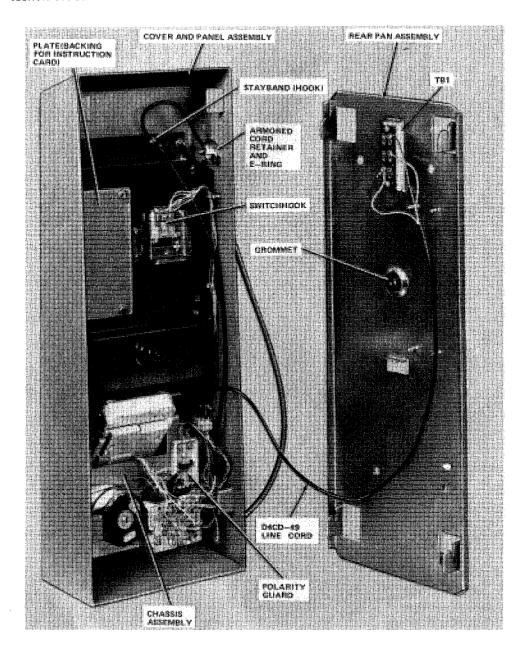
10A Coinless Telephone Set With Rear Pan Assembly Removed
